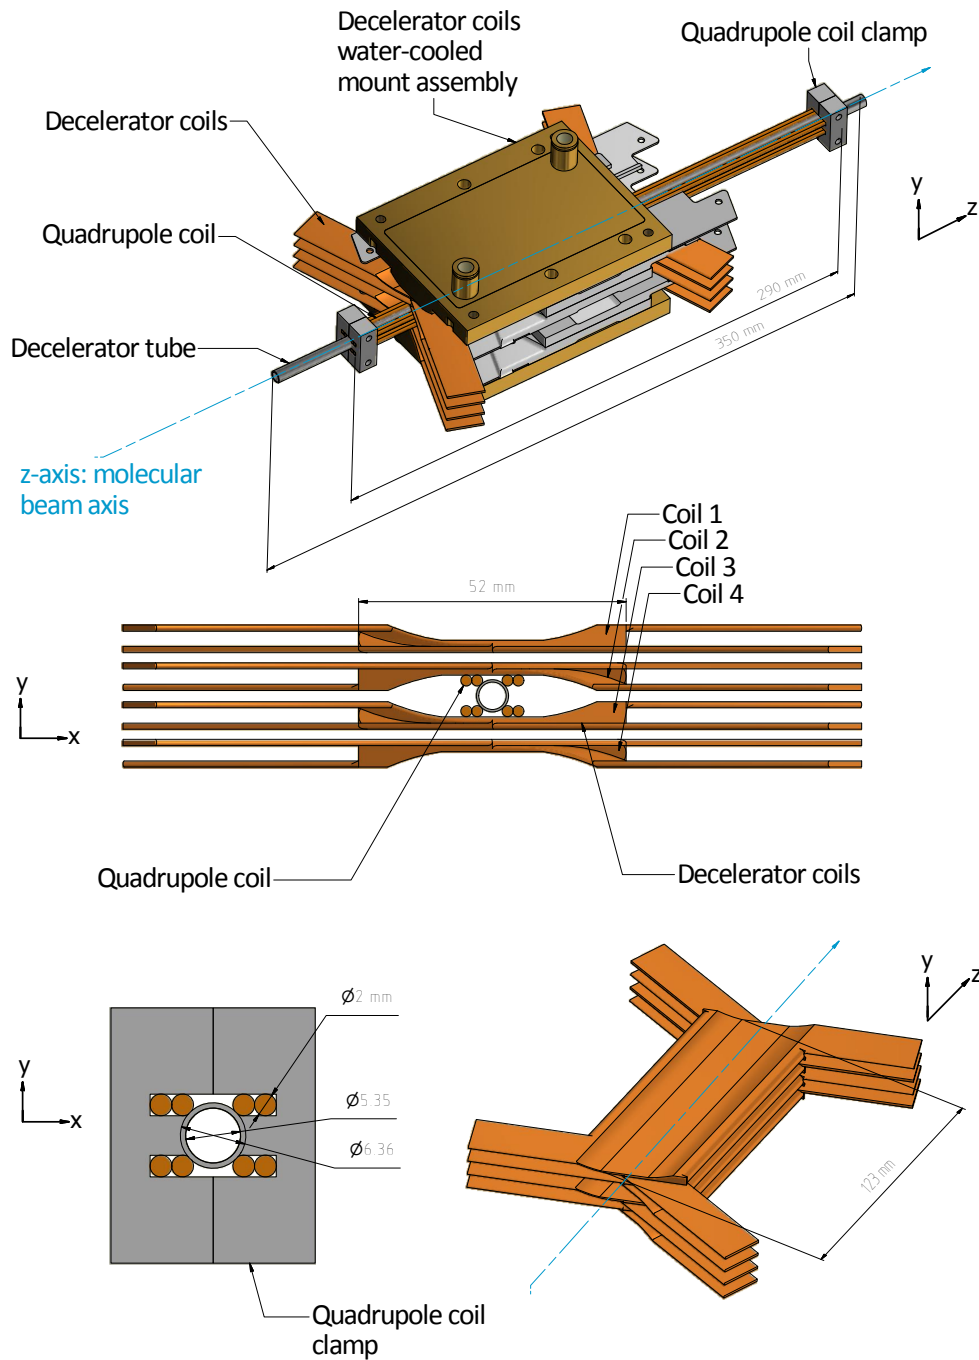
Drawings of the decelerator section from different angles. Top: a single, fully-constructed decelerator module with all four flattened helical coils in place. The quadrupole guide sits around the decelerator tube. The coil mounts hold the coils which are sandwiched between two water-cooled plates. Both the quadrupole guide and the decelerator coils sit outside vacuum, the decelerator tube is the only volume under vacuum. The coil mounts allow a modular design. There are also stands that fix the module to the optical table in order to support its weight. The quadrupole wires are correctly positioned around the decelerator tube by the quadrupole clamp. Middle: cross sectional view of both the decelerator coils and quadrupole guide around the decelerator tube. Bottom: the quadrupole guide alone with the clamp (left) and the decelerator coils (right).
